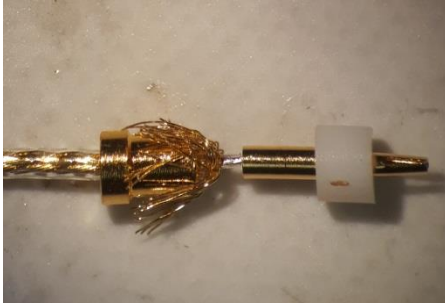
Once the inner has been inserted and soldered securely in position, move the crimp insert back up the cable and arrange the outer strands around it as shown in photo. Make sure that none of the outer strands touch the contact assembly or this will lead to a short between the inner and the outer when the connector is assembled.
